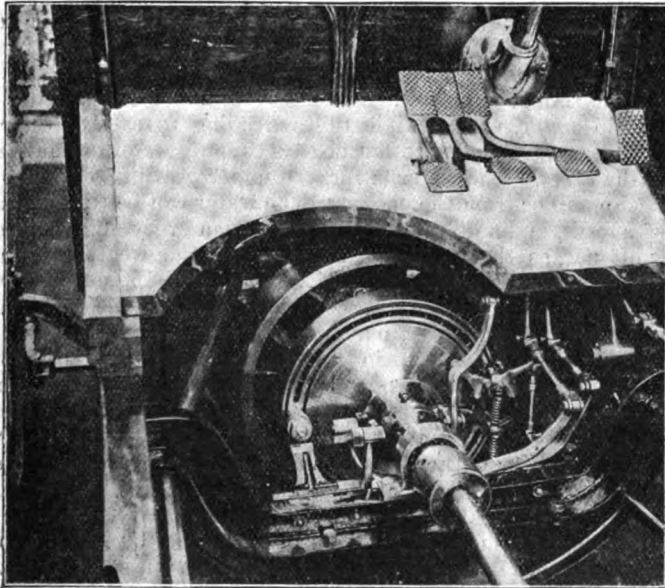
The Henriot Chassis with Combined Clutch and Change-Speed Gear.
